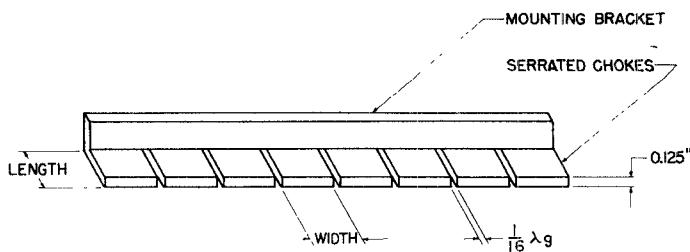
Rectangular cross section choke which was mounted on fixture in Fig. 2.
